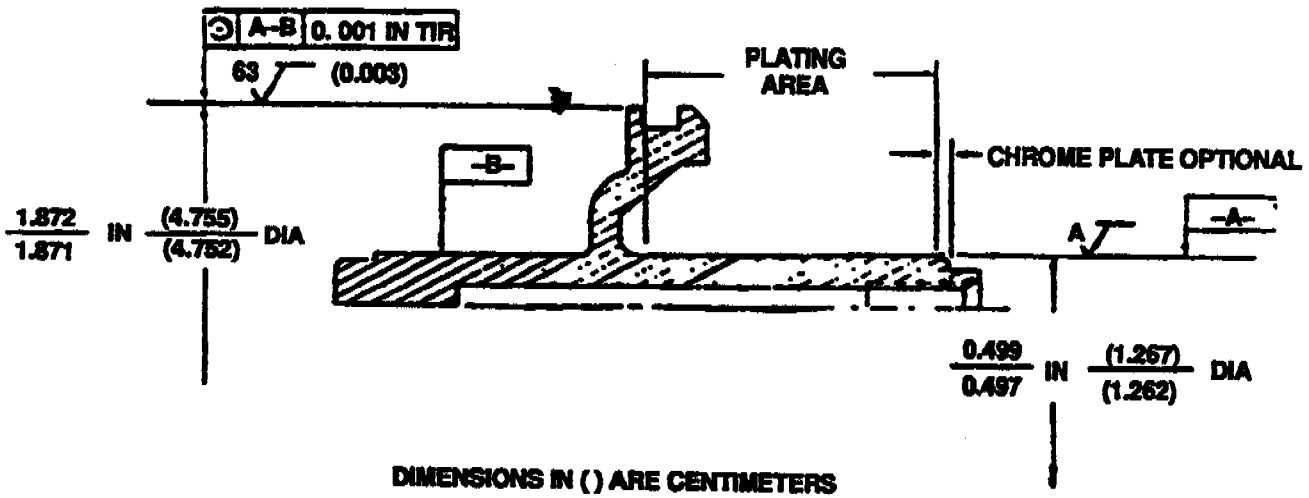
Air Inlet Guide Vane Actuator Piston Plating Areas.
